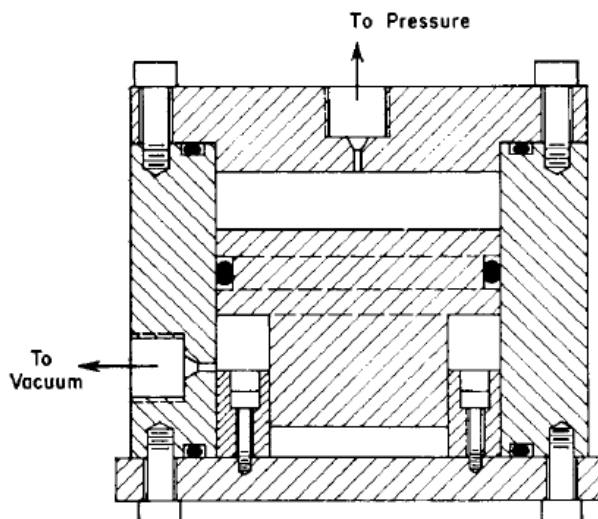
Vacuum Compression Molding apparatus design (cross-section) published by Tung in 1960 [15]
